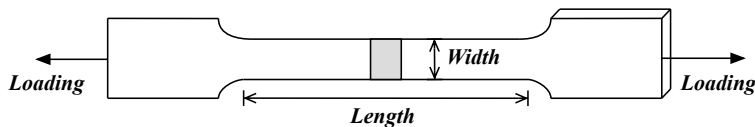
Sketch of a cross-weld tensile specimen.
